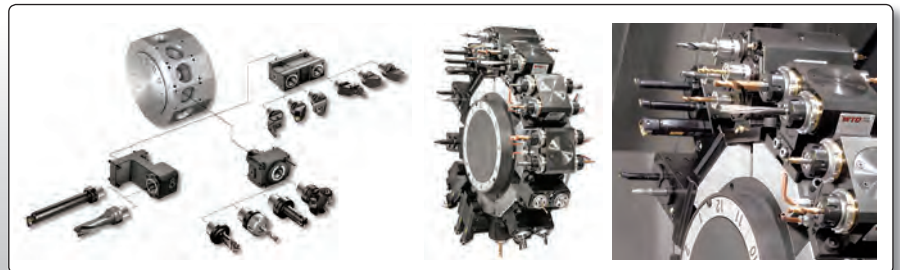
Unit built structure of the turret and doubled tools in the turret [WTO]
